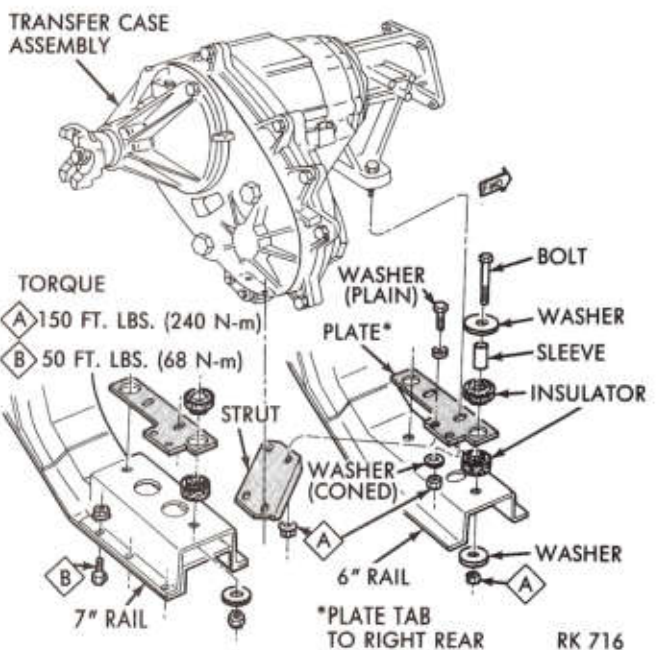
Engine Mounts, Rear, Four-Wheel-Drive
